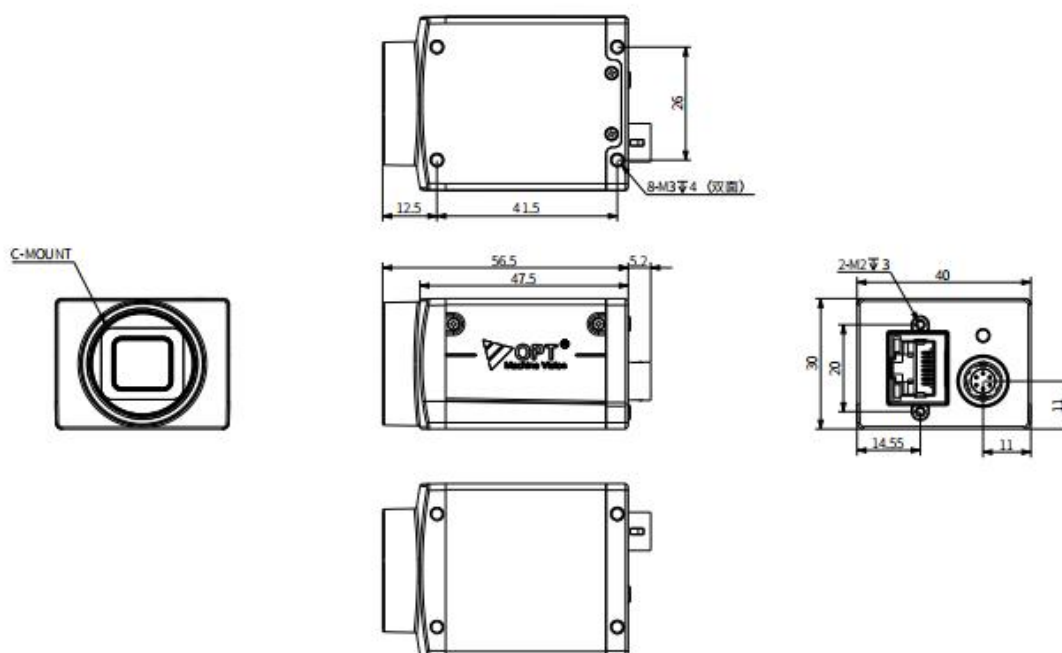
30mm × 40mm × 47.5mm (Dimensional drawing)
